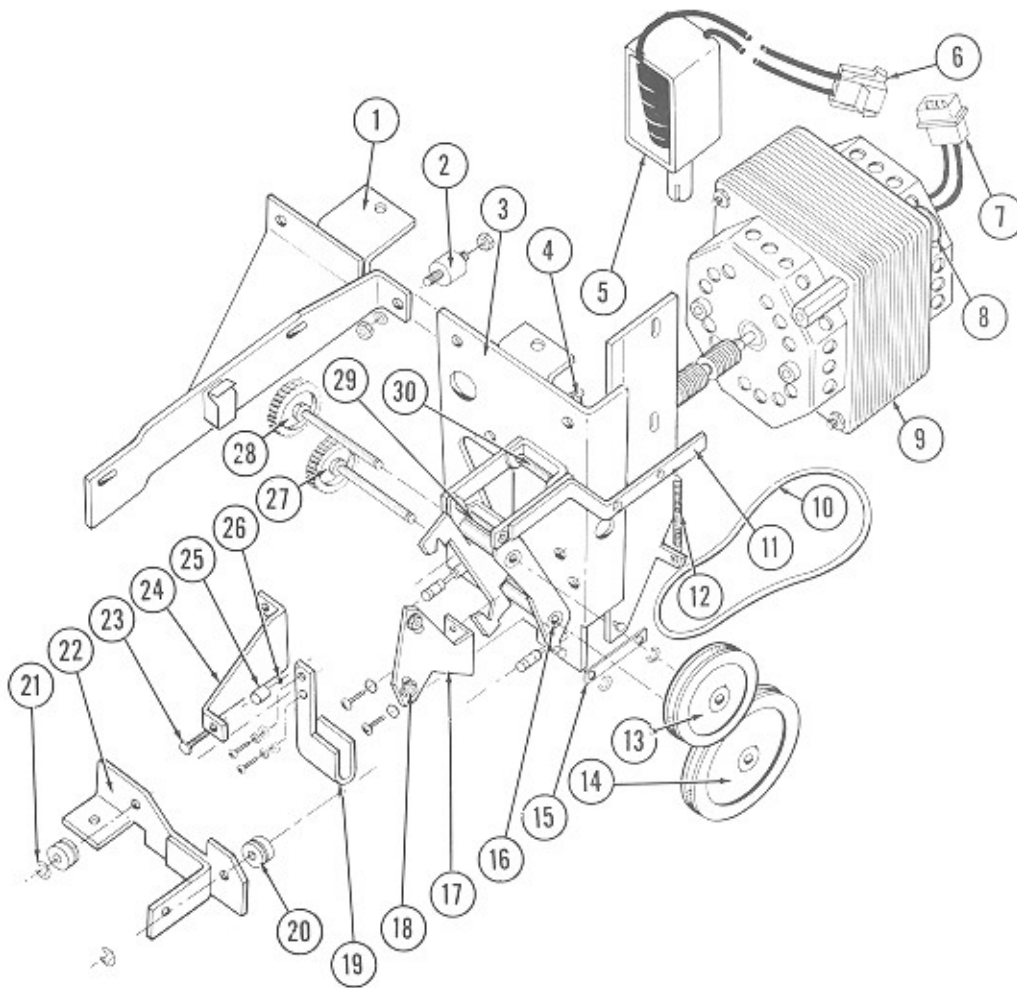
TURNTABLE MOTOR & MOUNTING BRACKET ASSEMBLY
